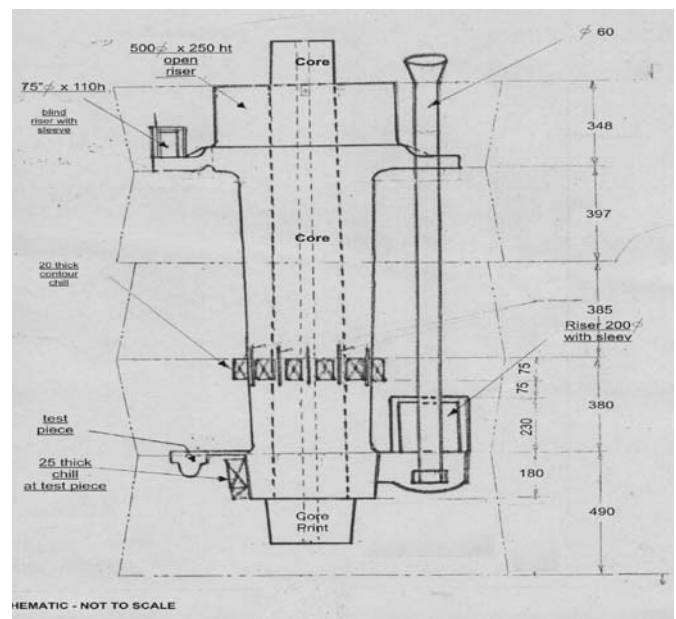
Feeding Method for the Hollow Shaft Casting
